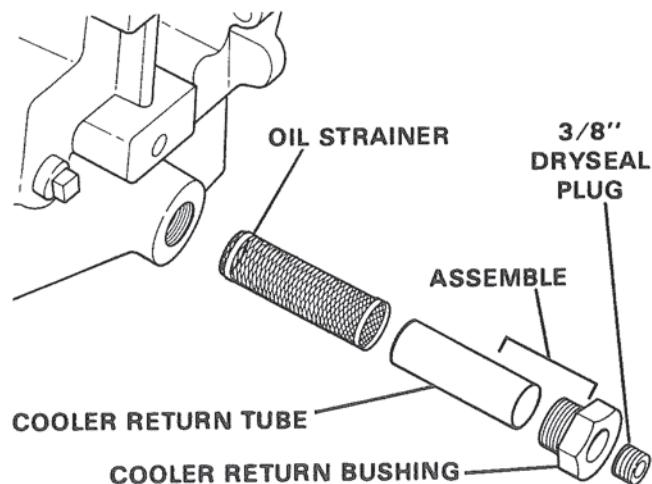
Installing Oil Strainer and Cooler Return Tube and Bushing Assembly.
